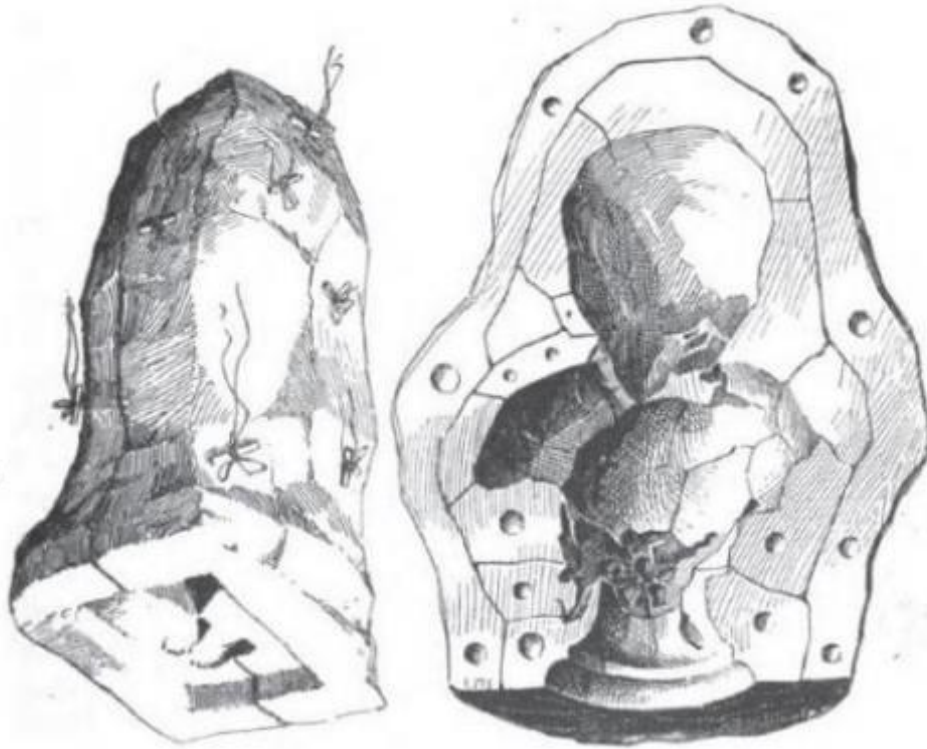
Drawing of a plaster piece-mould within its outer mantle mould. (from Partridge 1895 fig 1, 81)
